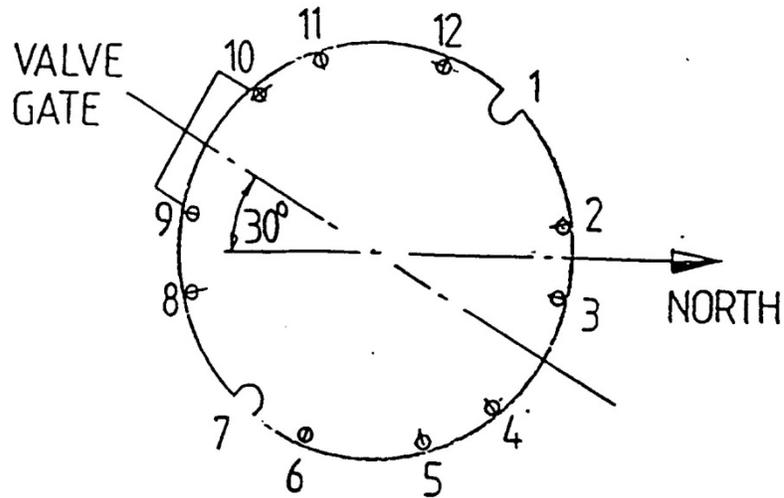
VALVE -SSW/NSW BOLT LOCATION
